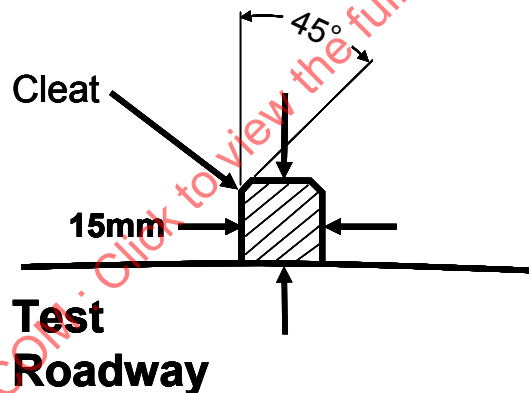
CROSS SECTIONAL VIEW OF MOUNTED 90° CLEAT
